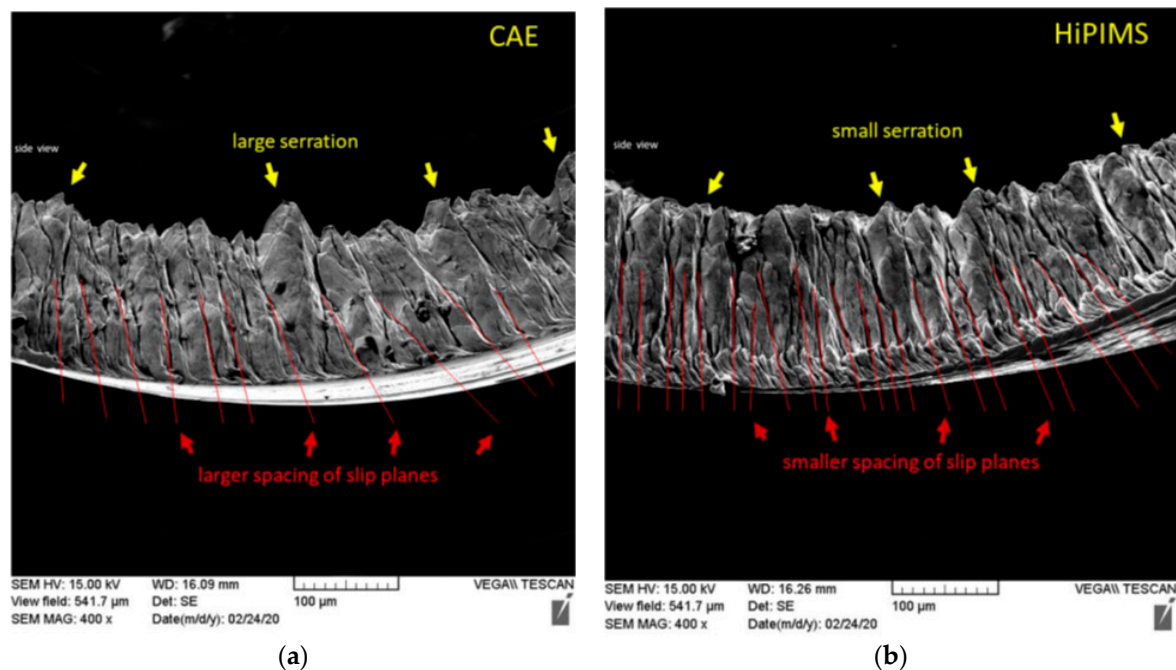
Chips upsurface produced by cutting tool with: (a) CAD and (b) HiPIMS coating.
